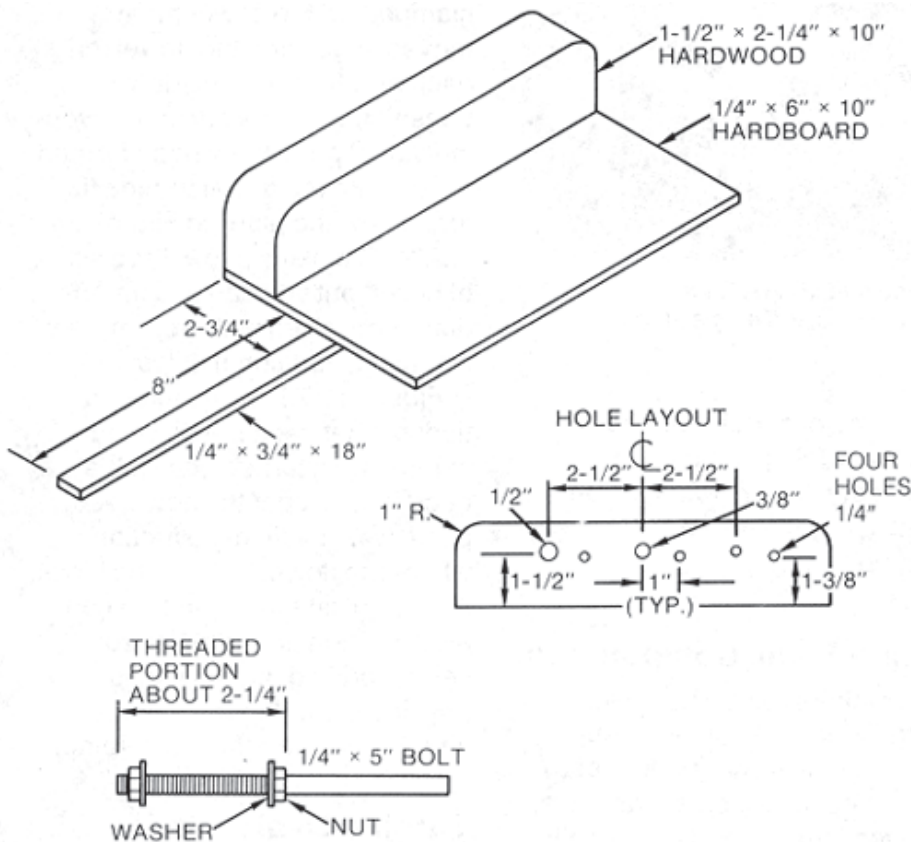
A dowel turning fixture makes it easy to turn small parts from dowel stock.
